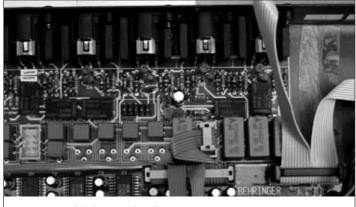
Cable layout with new board installed. PHOTO 2: Cable layout detail.
